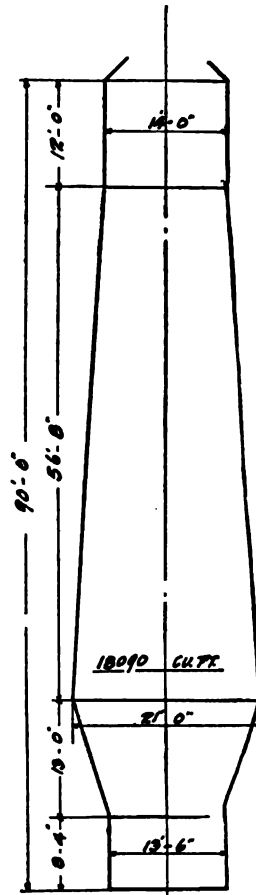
Isabella Furnace, Carnegie Steel Company. (Am. Inst. of Mining Engrs.)
